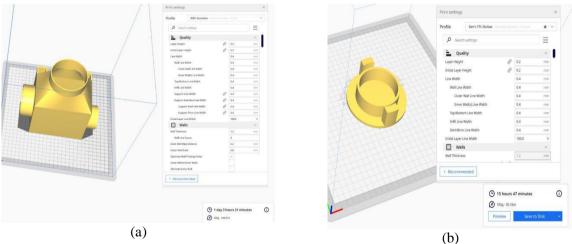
3D printed parts; (a) Filter body, (b) Cap
